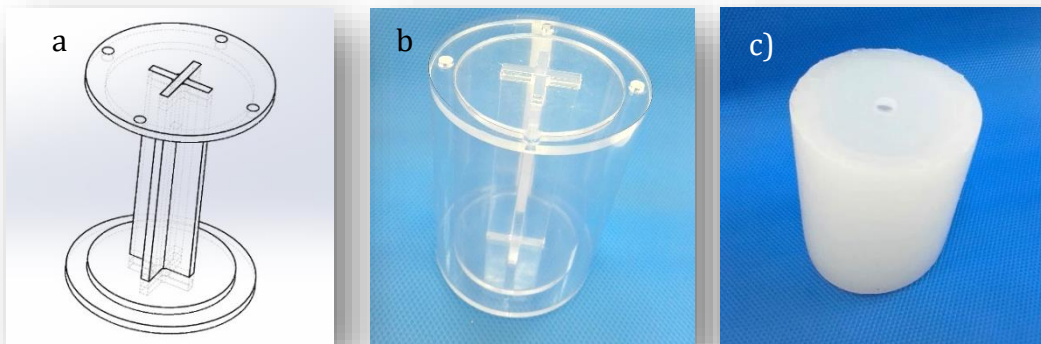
Fabrication of the cylindrical chamber, as in model: a) CAD model of the mould, b) final assembled mould and c) final ECOFLEX 00-30 casted chamber.
